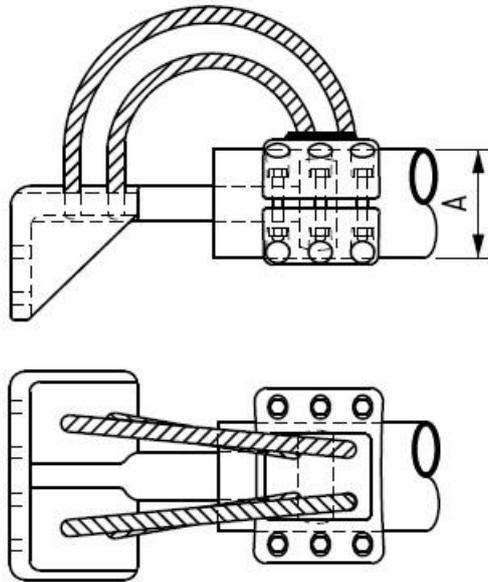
EEC-8HV-S: Expansion Clamp - 8-Hole Vertical Pad – Equipment Mounted – Slide (D-DT-6354)
